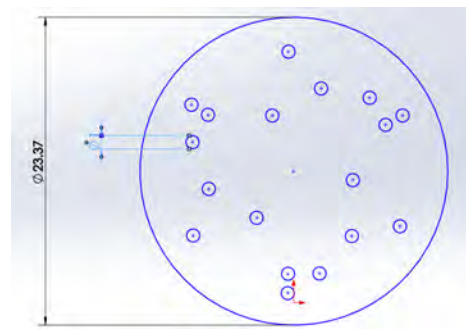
CAD drawing of the 3D printed mask with 1mm holes 1/24th the diameter of the mask
